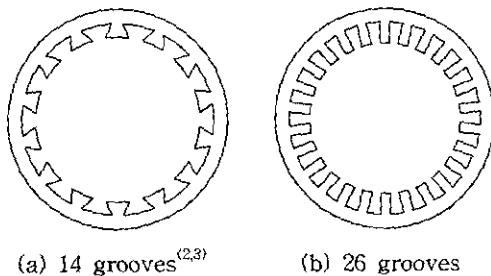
Cross sections of the heat pipes fabricated by drawing.
